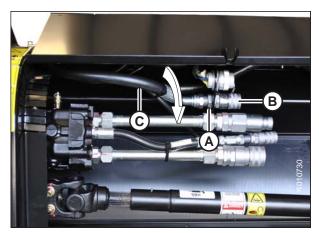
Auger and Reel Pressure Coupler and Hose – 18-Ft. Header Shown
